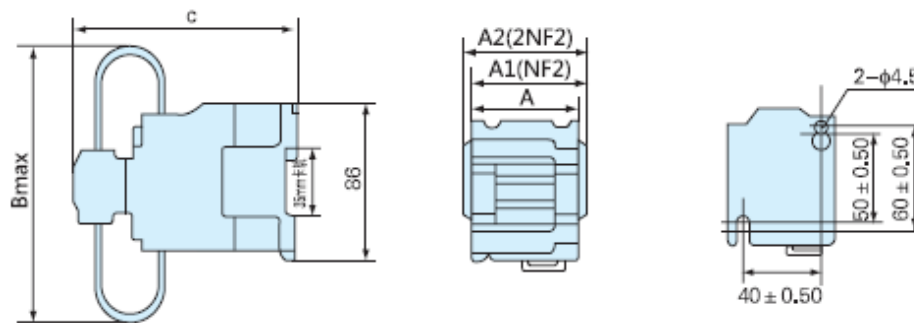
NDK1-32, 40 External Dimensions and Installation Dimensions
